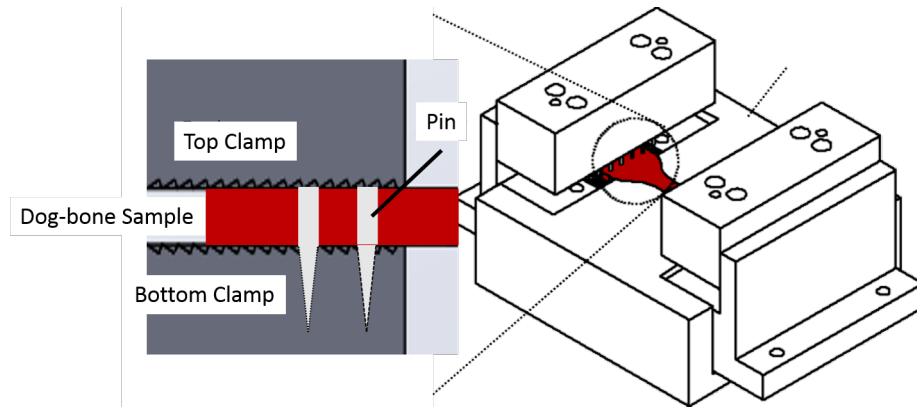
Schematic drawing of the 3D printed clamps with needles
